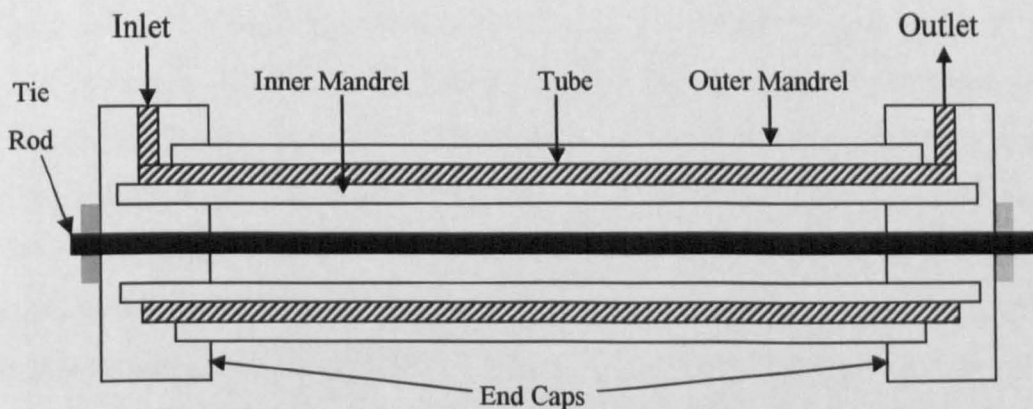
Mould used for the manufacture of the 89.1mm diameter tubes
